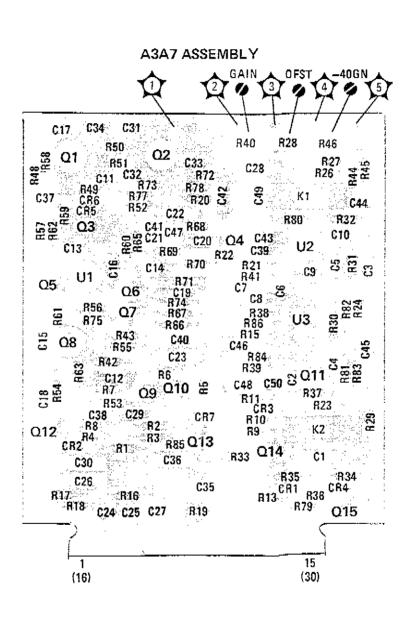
A3A7 FM Driver Assembly Component, Adjustment, and Test Point Locations
